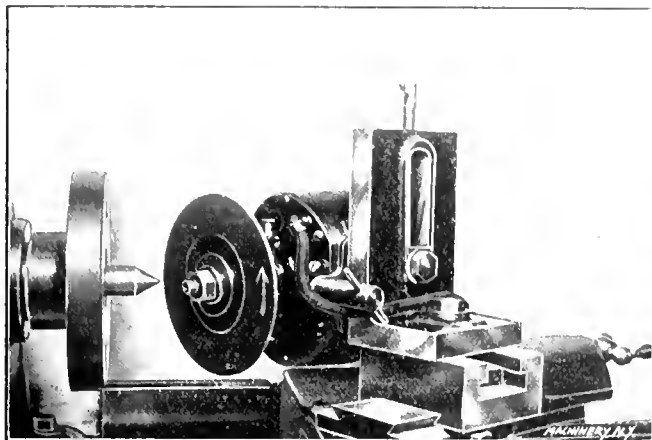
The "Lektro" Portable Grinder truing up a Lathe Center.
